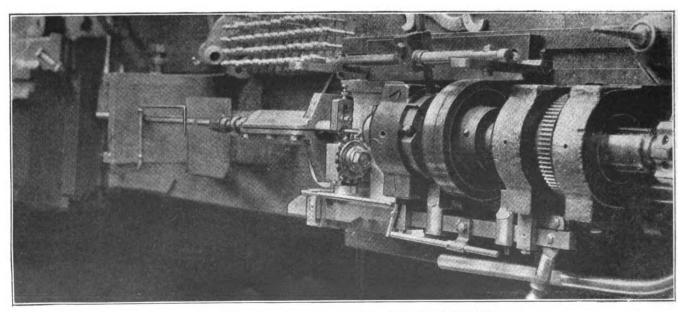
TOP VIEW OF SCREW CUTTING MACHINE
